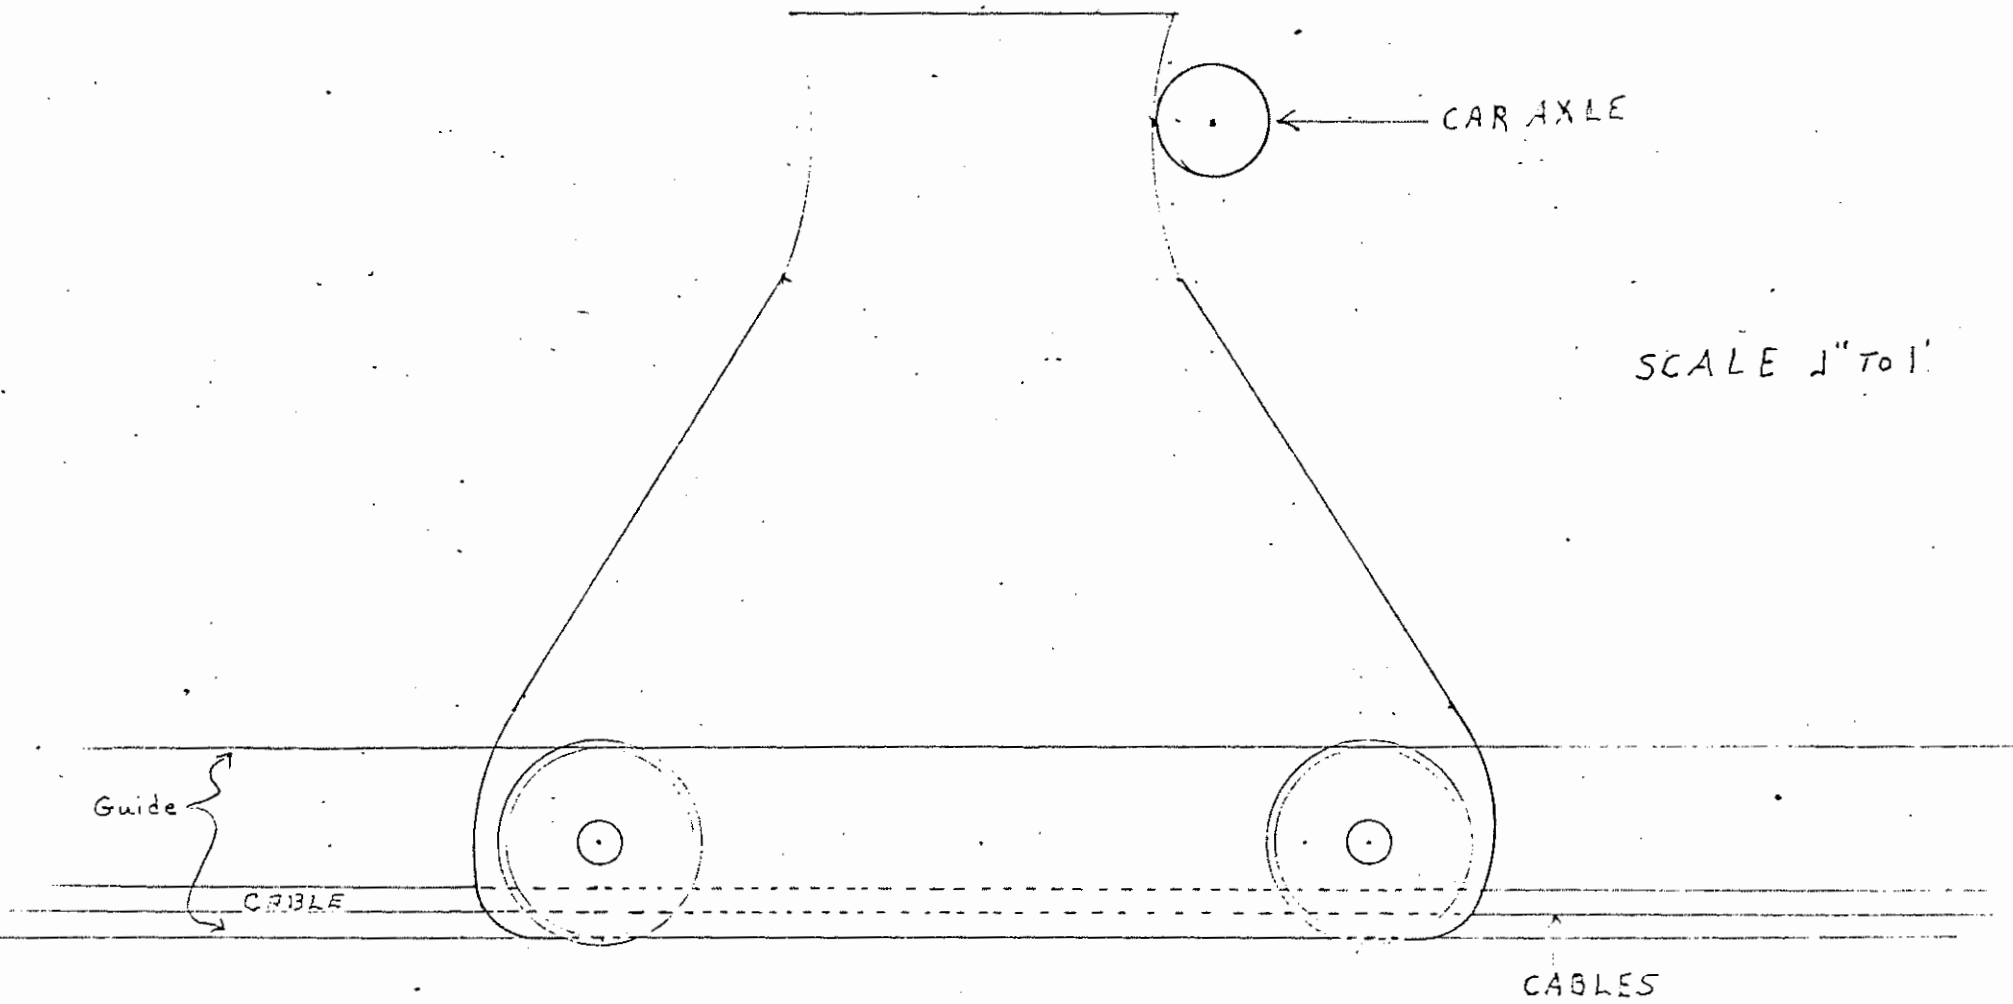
Side View of Axlepusher Showing Position of Car Axle
